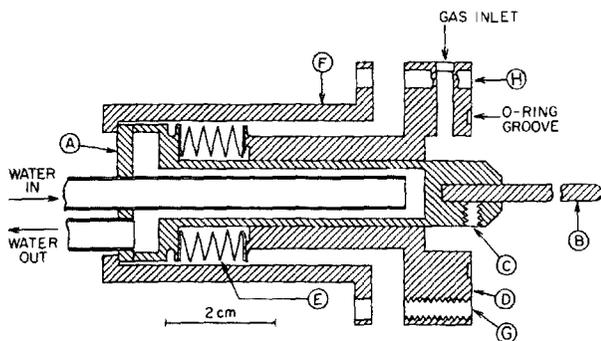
Scale drawing of cathode assembly: A, hollow tube; B, thoriated tungsten cathode rod; C, set screw hole; D, support structure; E, bellows; F, outside casing; G and H, Teflon screw holes. Originally the assembly (other than the cathode) was made out of brass but is now made out of stainless steel.
